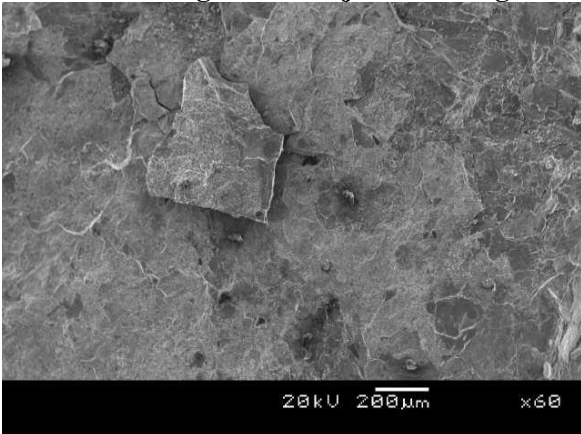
Exhaust residue build-up, inner area adjacent to original fracture (x60, SEM)
